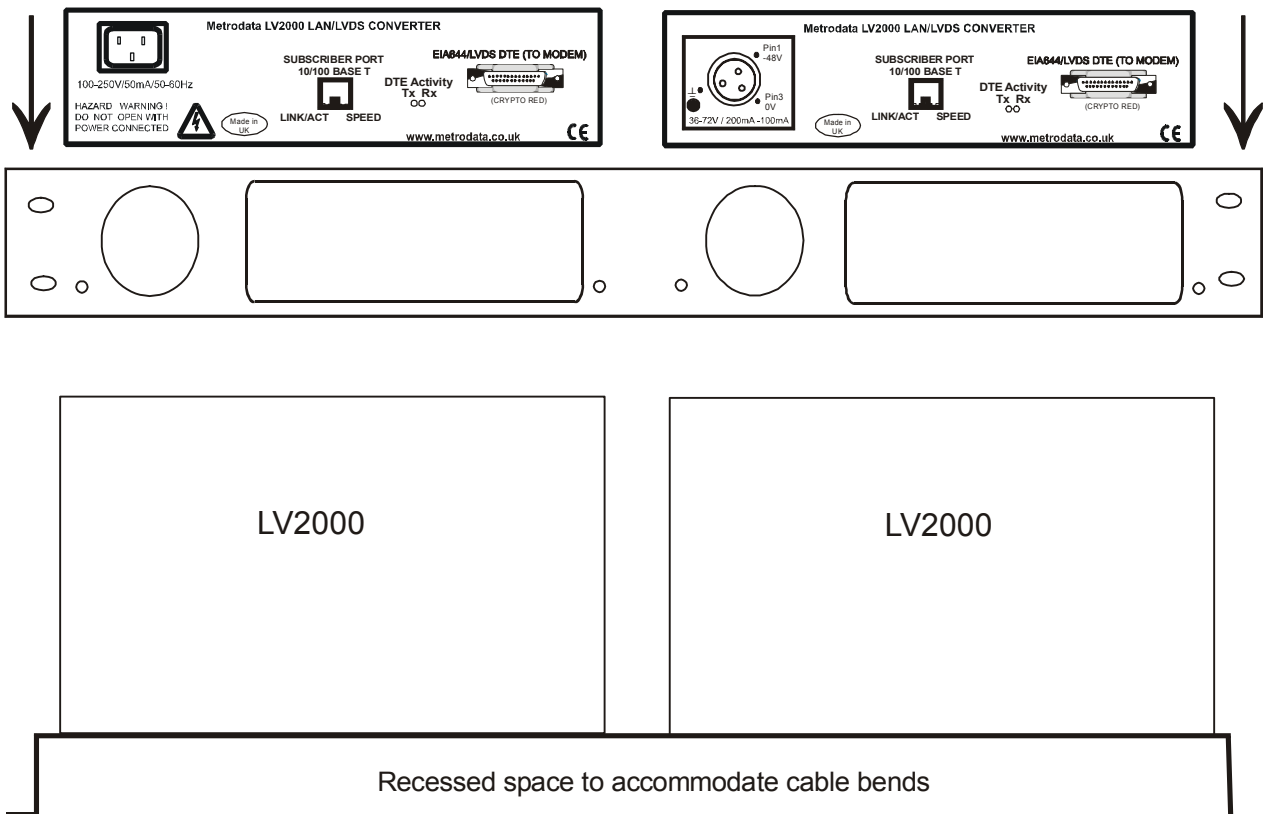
3 2-unit recessed rackmounting plan & elevation
